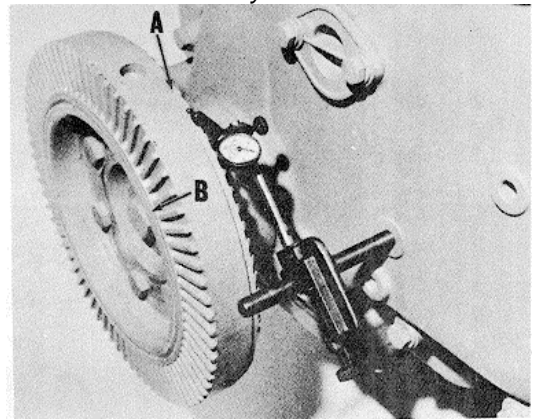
, (N114156). Checking crankshaft flange eccentricity and wobble
